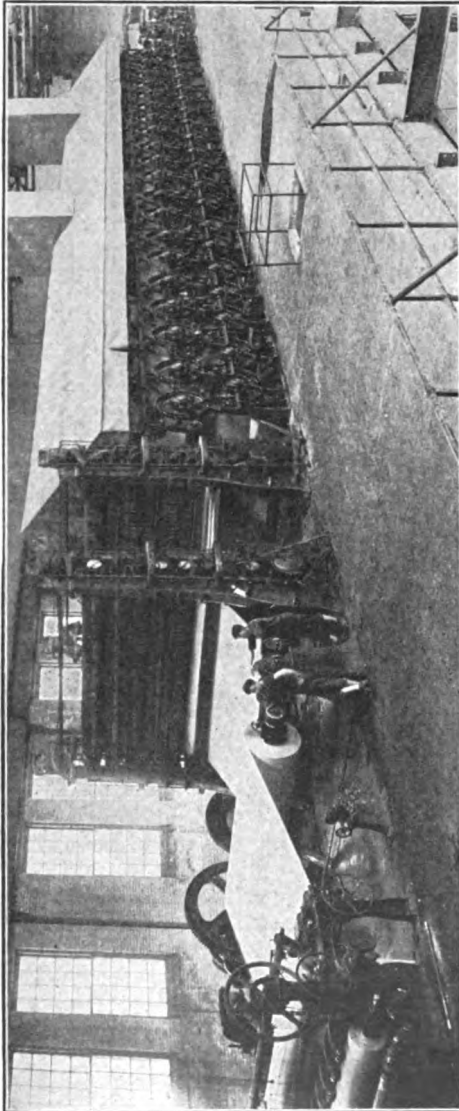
Typical Fourdrinier paper machine from dry end, showing two calendar stacks.
